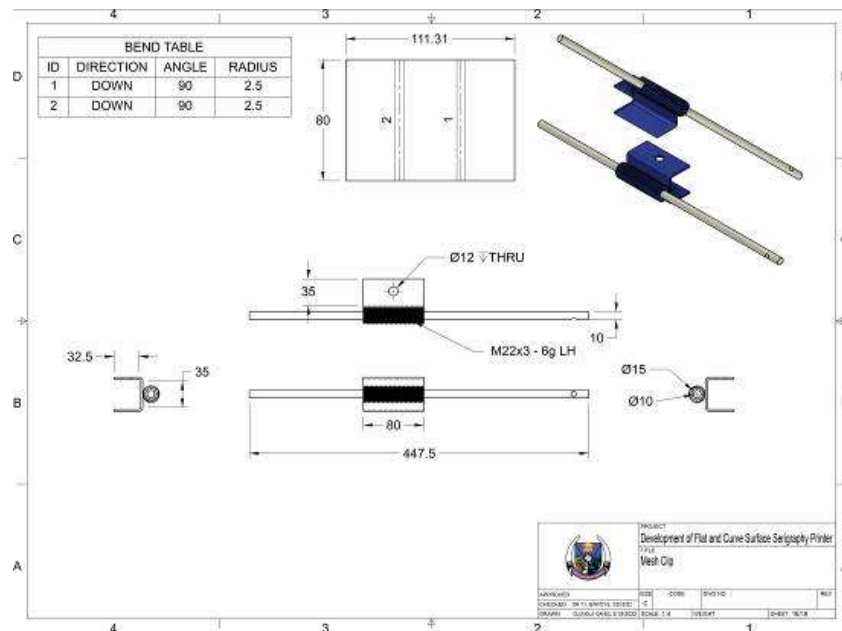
Detailed Drawings of the mesh holders with dimensions
